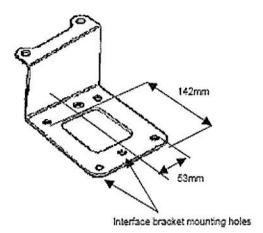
Air cleaner mounting bracket fitted to TUM/TUL HS
